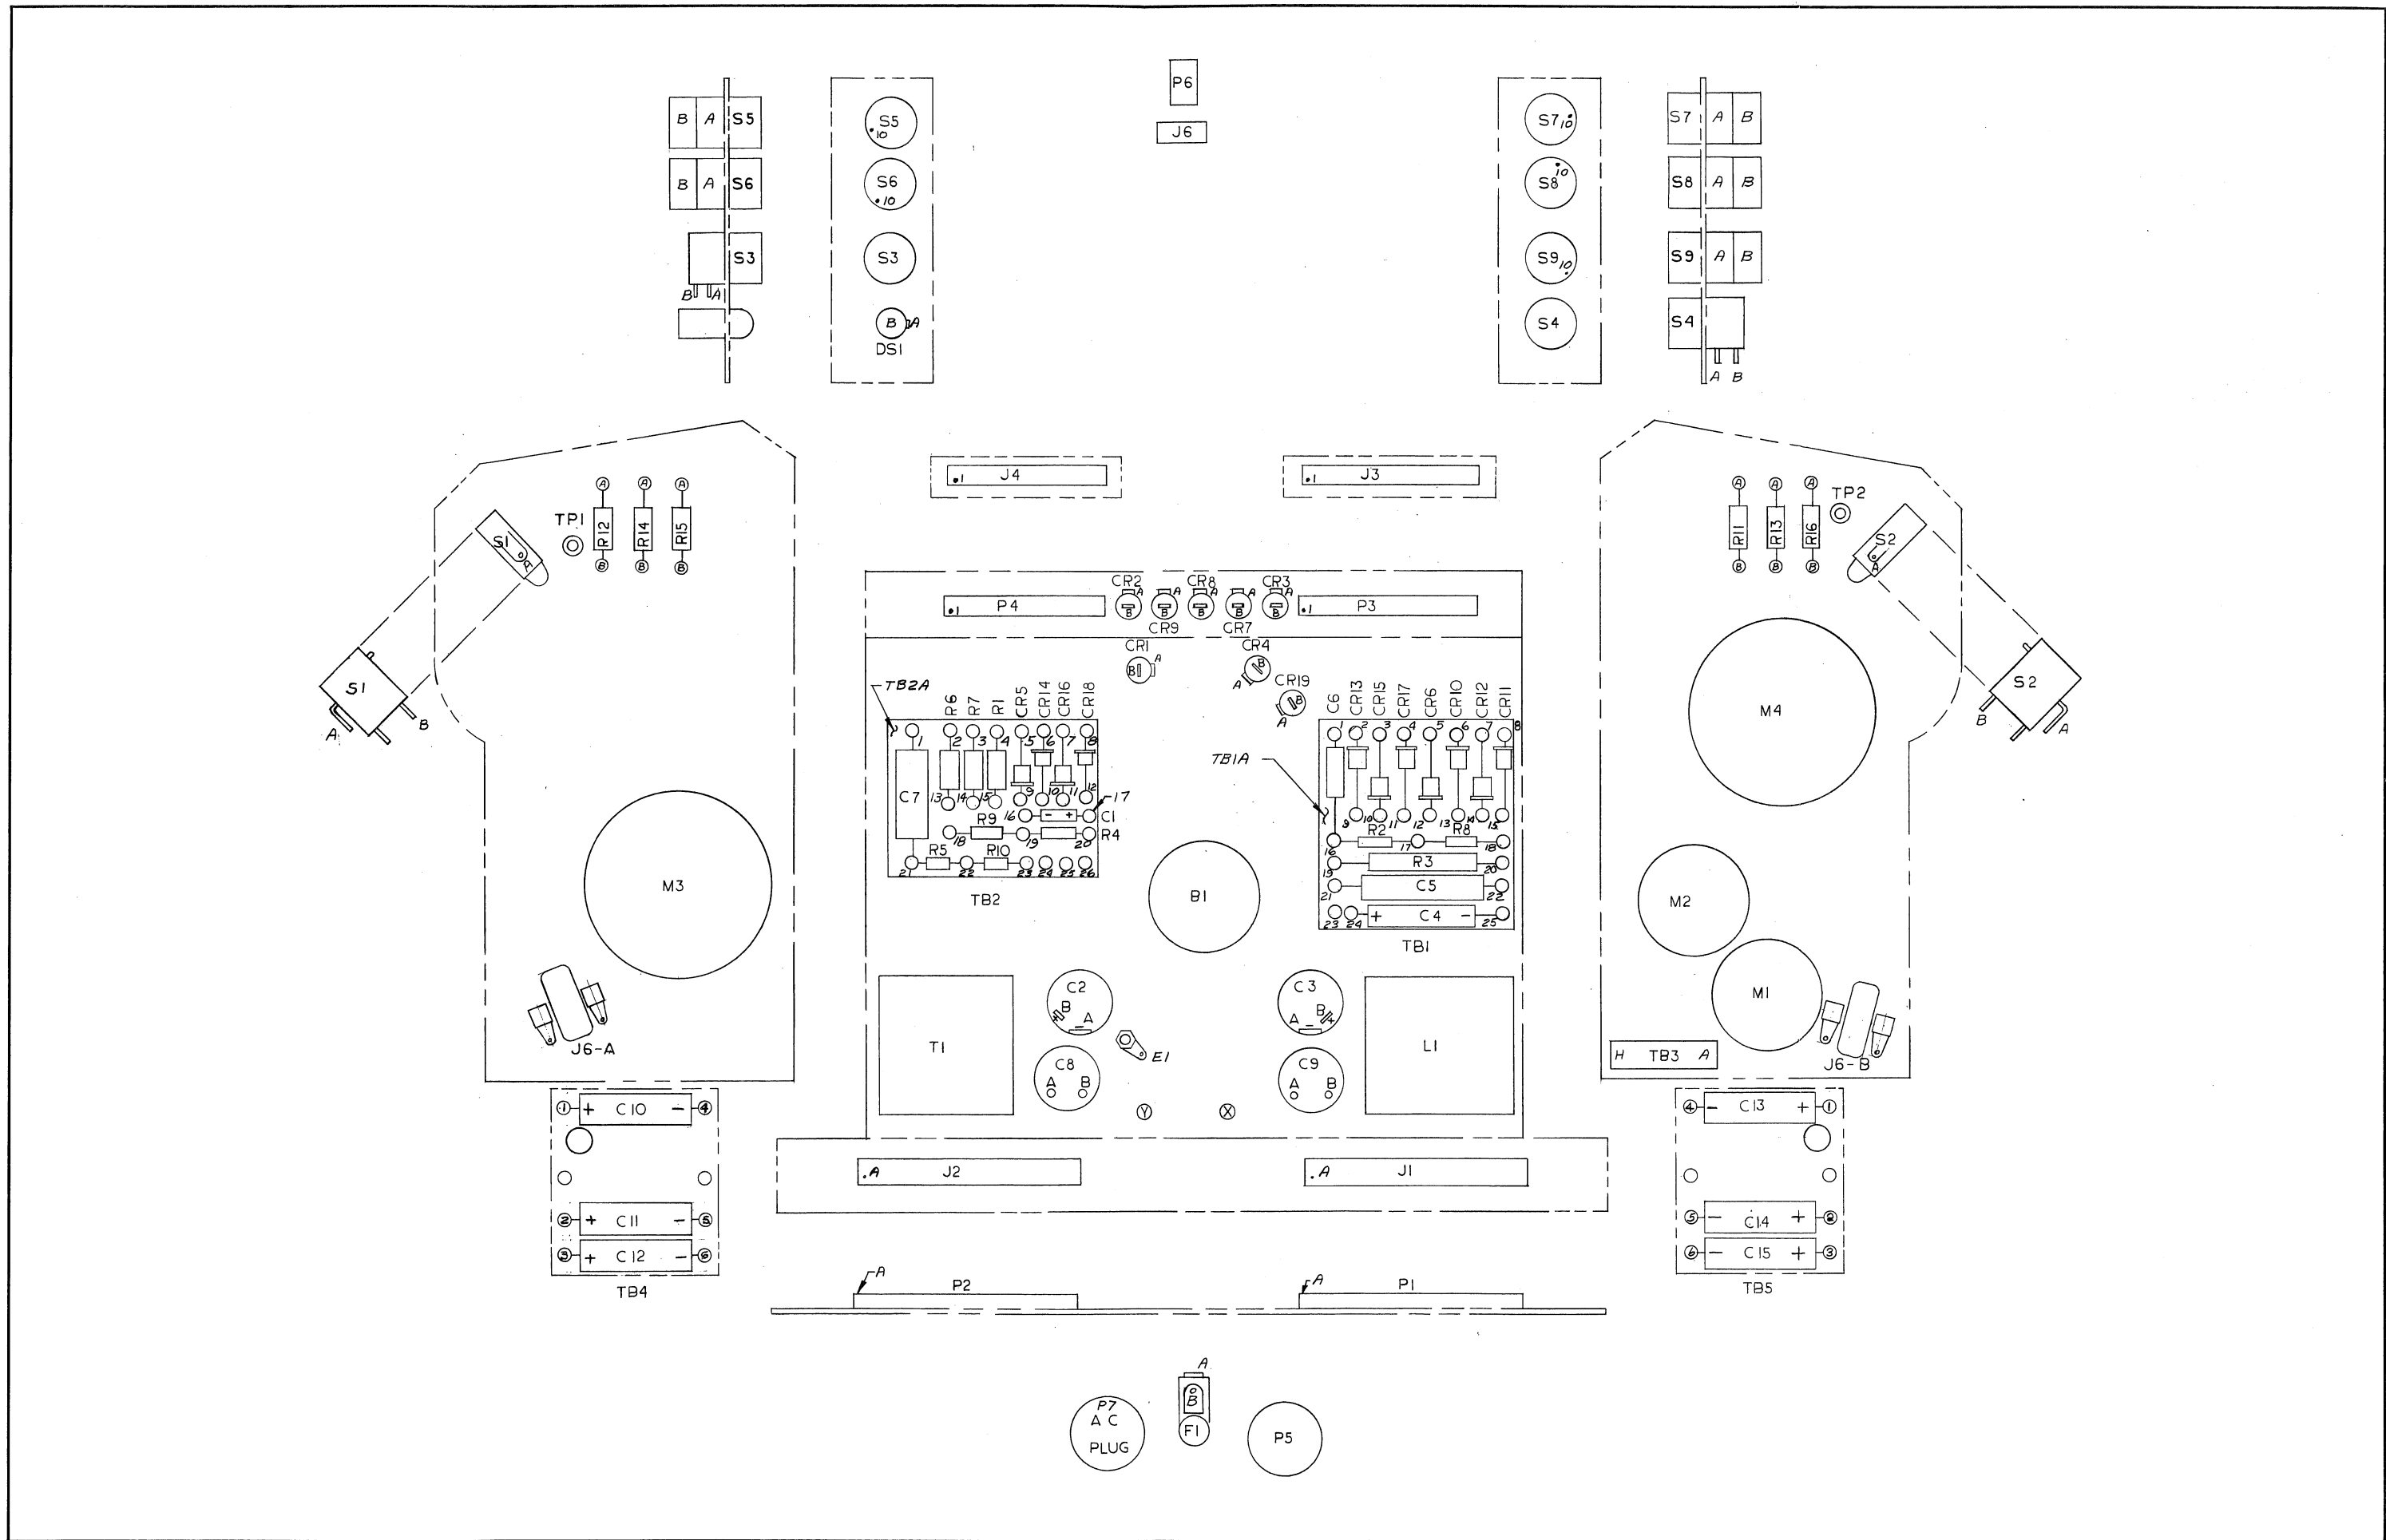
Main Assembly, Location of Electronic Parts 53
